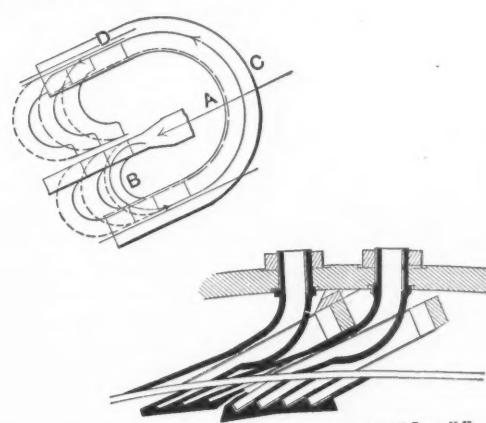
Method of taking Steam from one Set of Buckets and Conveying it to a second Set in a Two-stage Machine.
